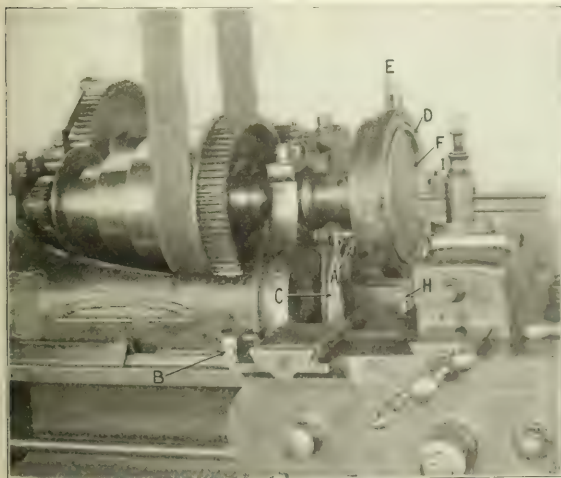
Magnetic Chuck for Finishing Packing Rings for Air Pump.
